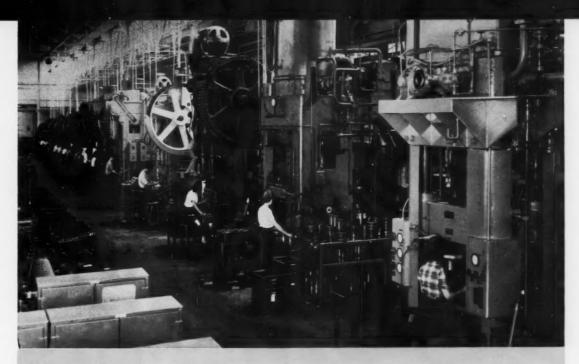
Some of the many different sizes of presses employed at Amplex to obtain closer dimensions, higher densities, smoother finishes, or changes in shape of powdered metal parts.
